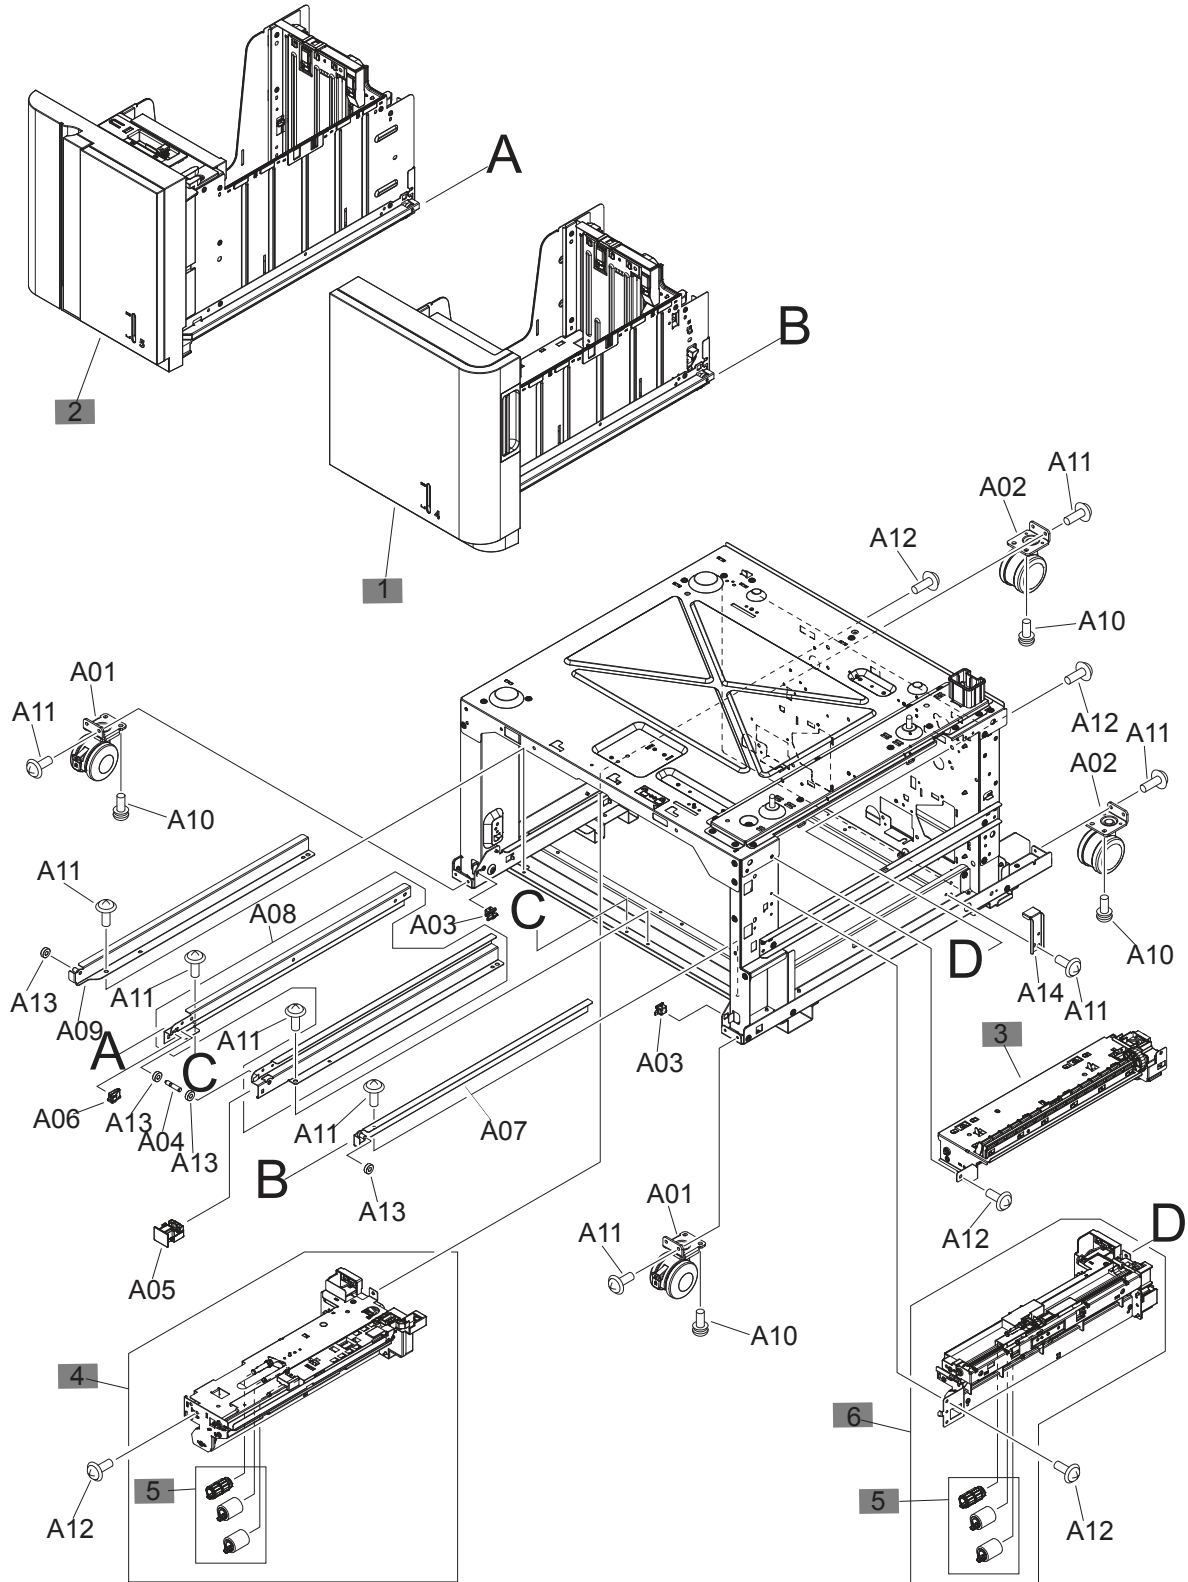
3500-sheet paper feeder (1 of 2)
